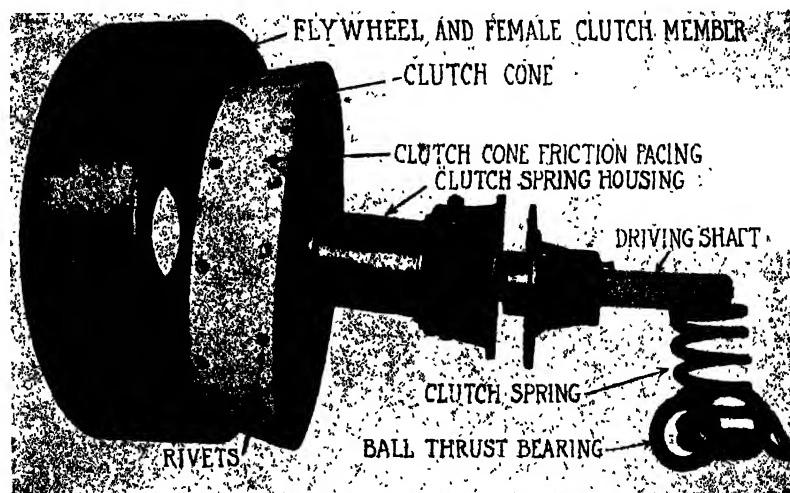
Cone Clutch Partially Disassembled to Show Important Components.
